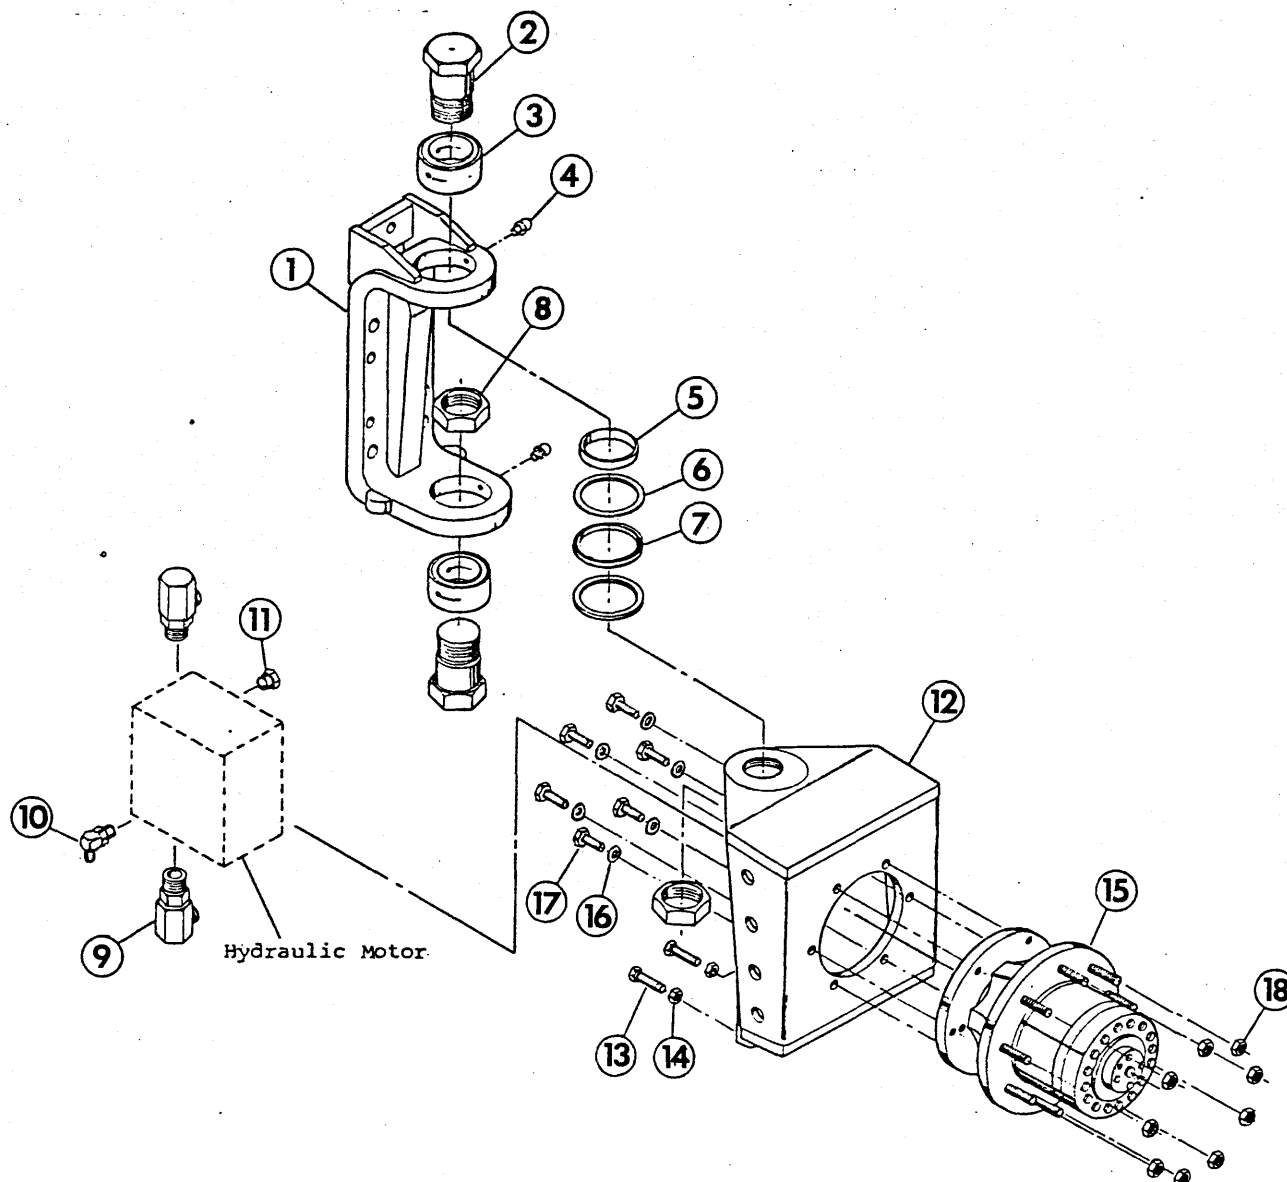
TORQUE DRIVE ASSEMBLY (ALL MODELS)
